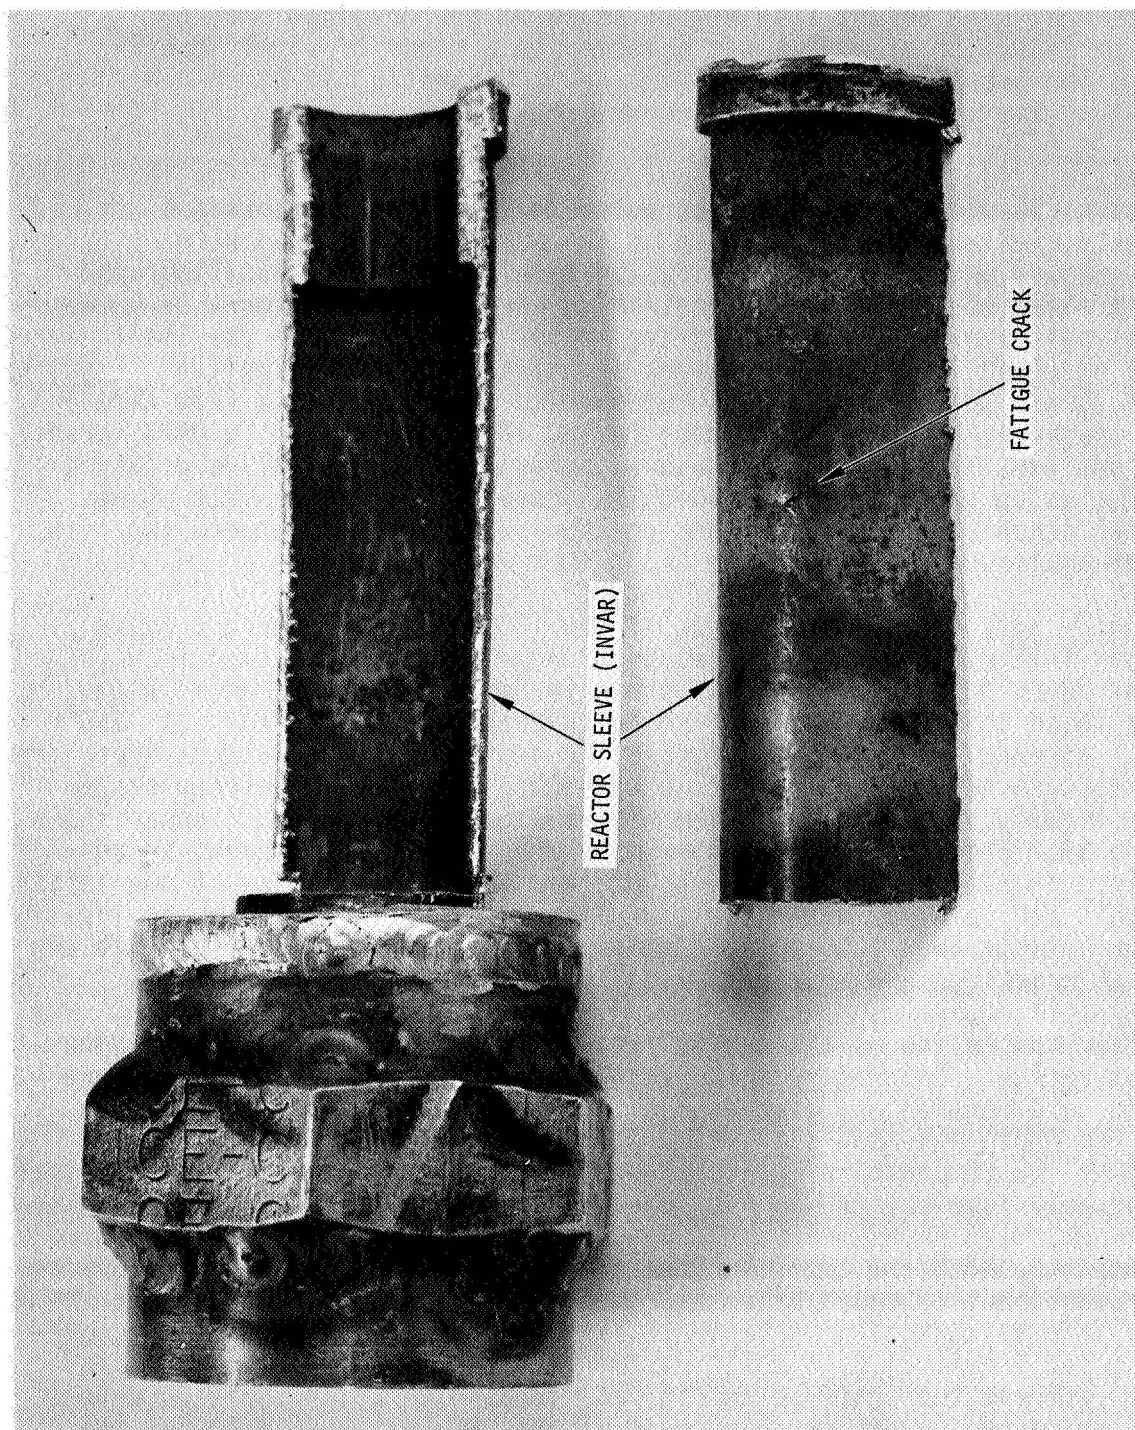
Sectioned Sleeve From Bellows Seal Cooled
